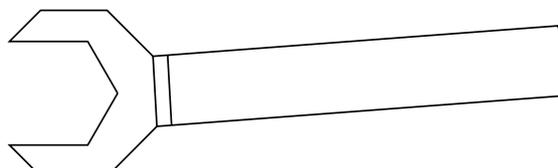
Wrench for glass insert nut (P/N 221-46977)
